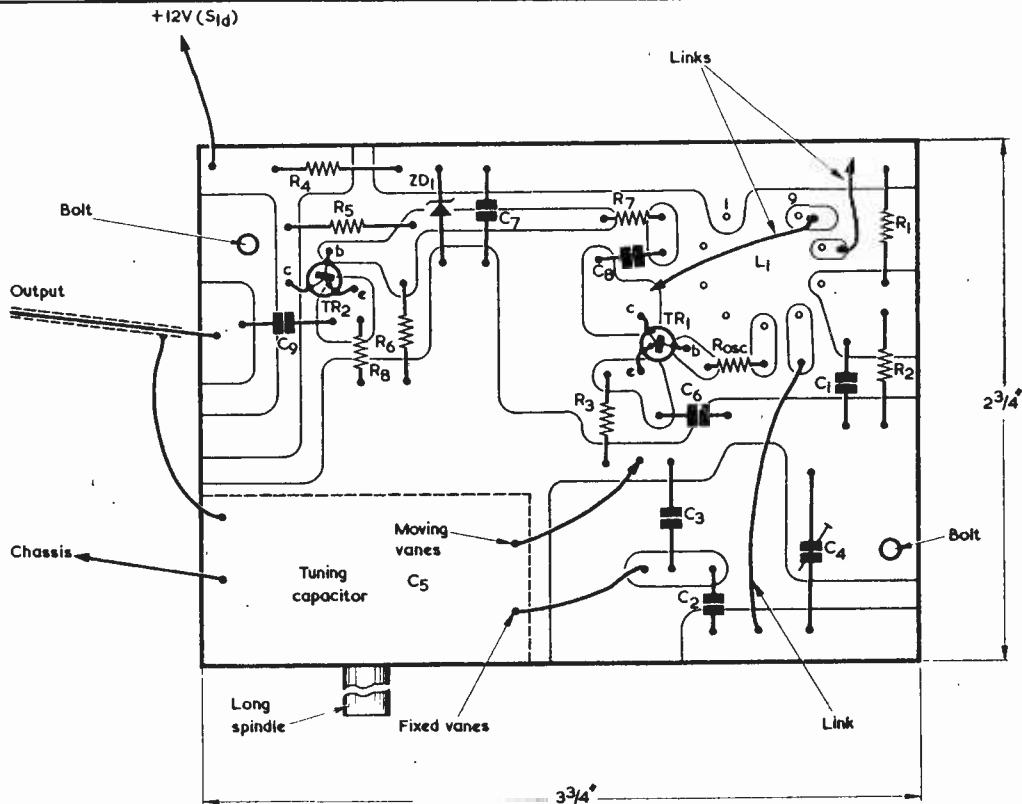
The layout of the v.f.o. printed circuit board. This view is with the components towards the reader
